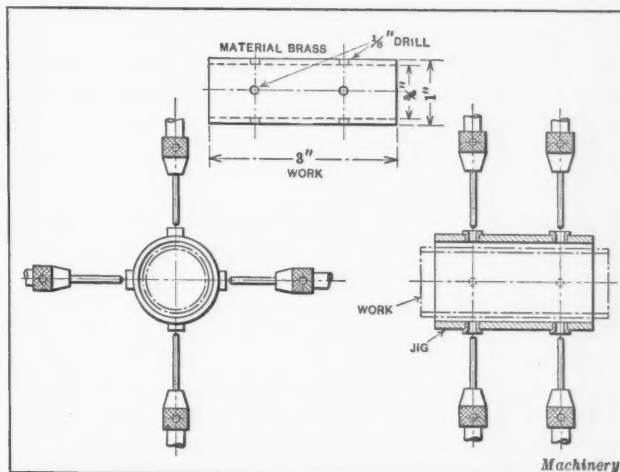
Spindle Arrangement for Hand-feed Machine designed for simultaneously drilling Eight Holes in a Brass Sleeve
